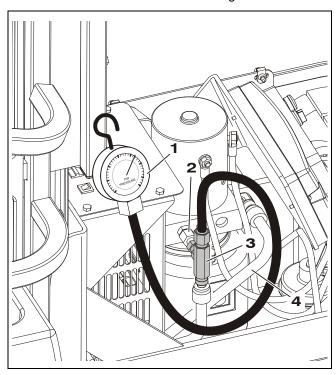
Typical Hydraulic Pressure Gauge Installation (Hydraulic Filter Removed).
